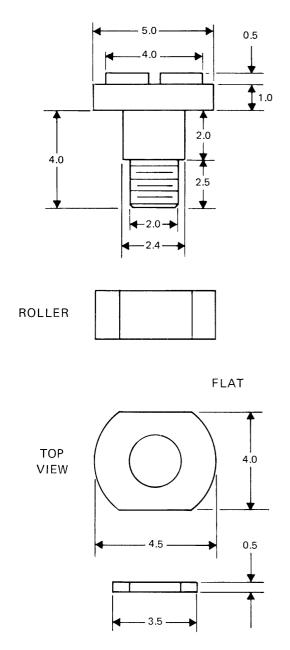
Guide Roller Washer, Guide Roller, and Shaft Screw (Ref. 10, 11, and 12; Figure 4-1).
